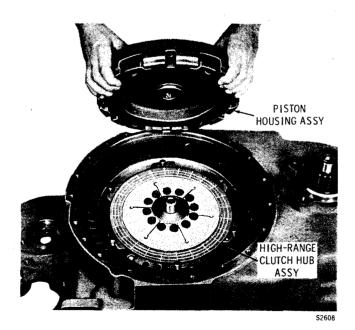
Installing high-range clutch piston housing assembly (TT)
